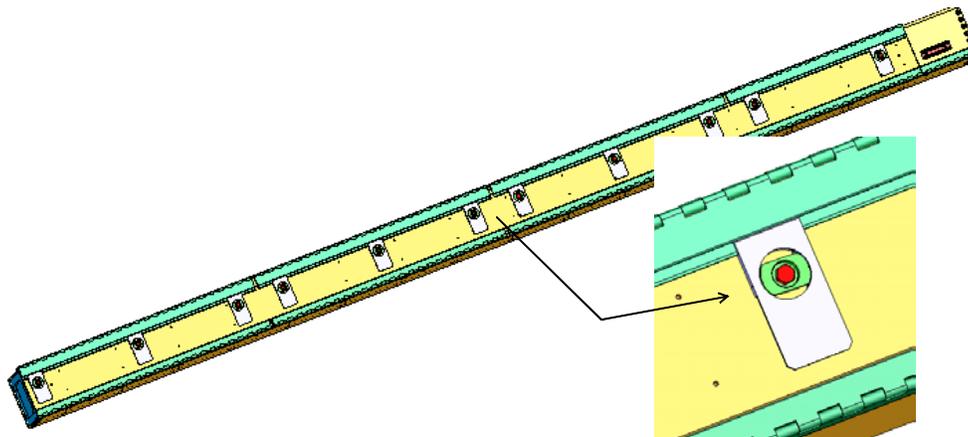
Clamshell Closure Latches and Keeper Bolts
